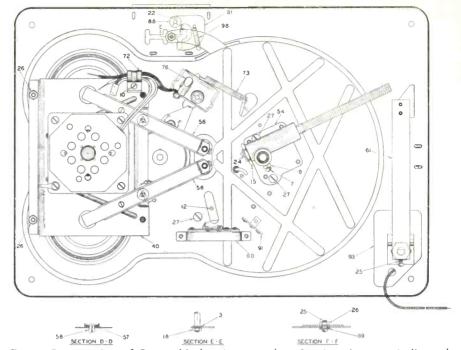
Bottom view of General Industries recorder. Section views are indicated.
